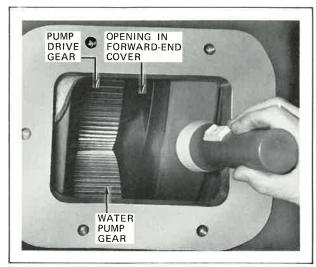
CHECKING FRONT GEAR TRAIN.
